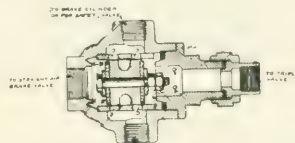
shows the valve in a reversed position to that in No. 3. In either of these latter positions the valve will work O. K.
